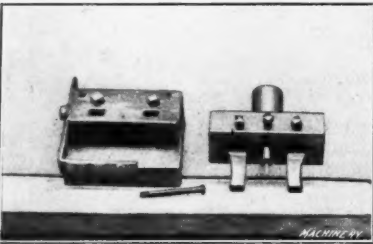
Piercing Punch and Die and One of the Pierced Rivets
